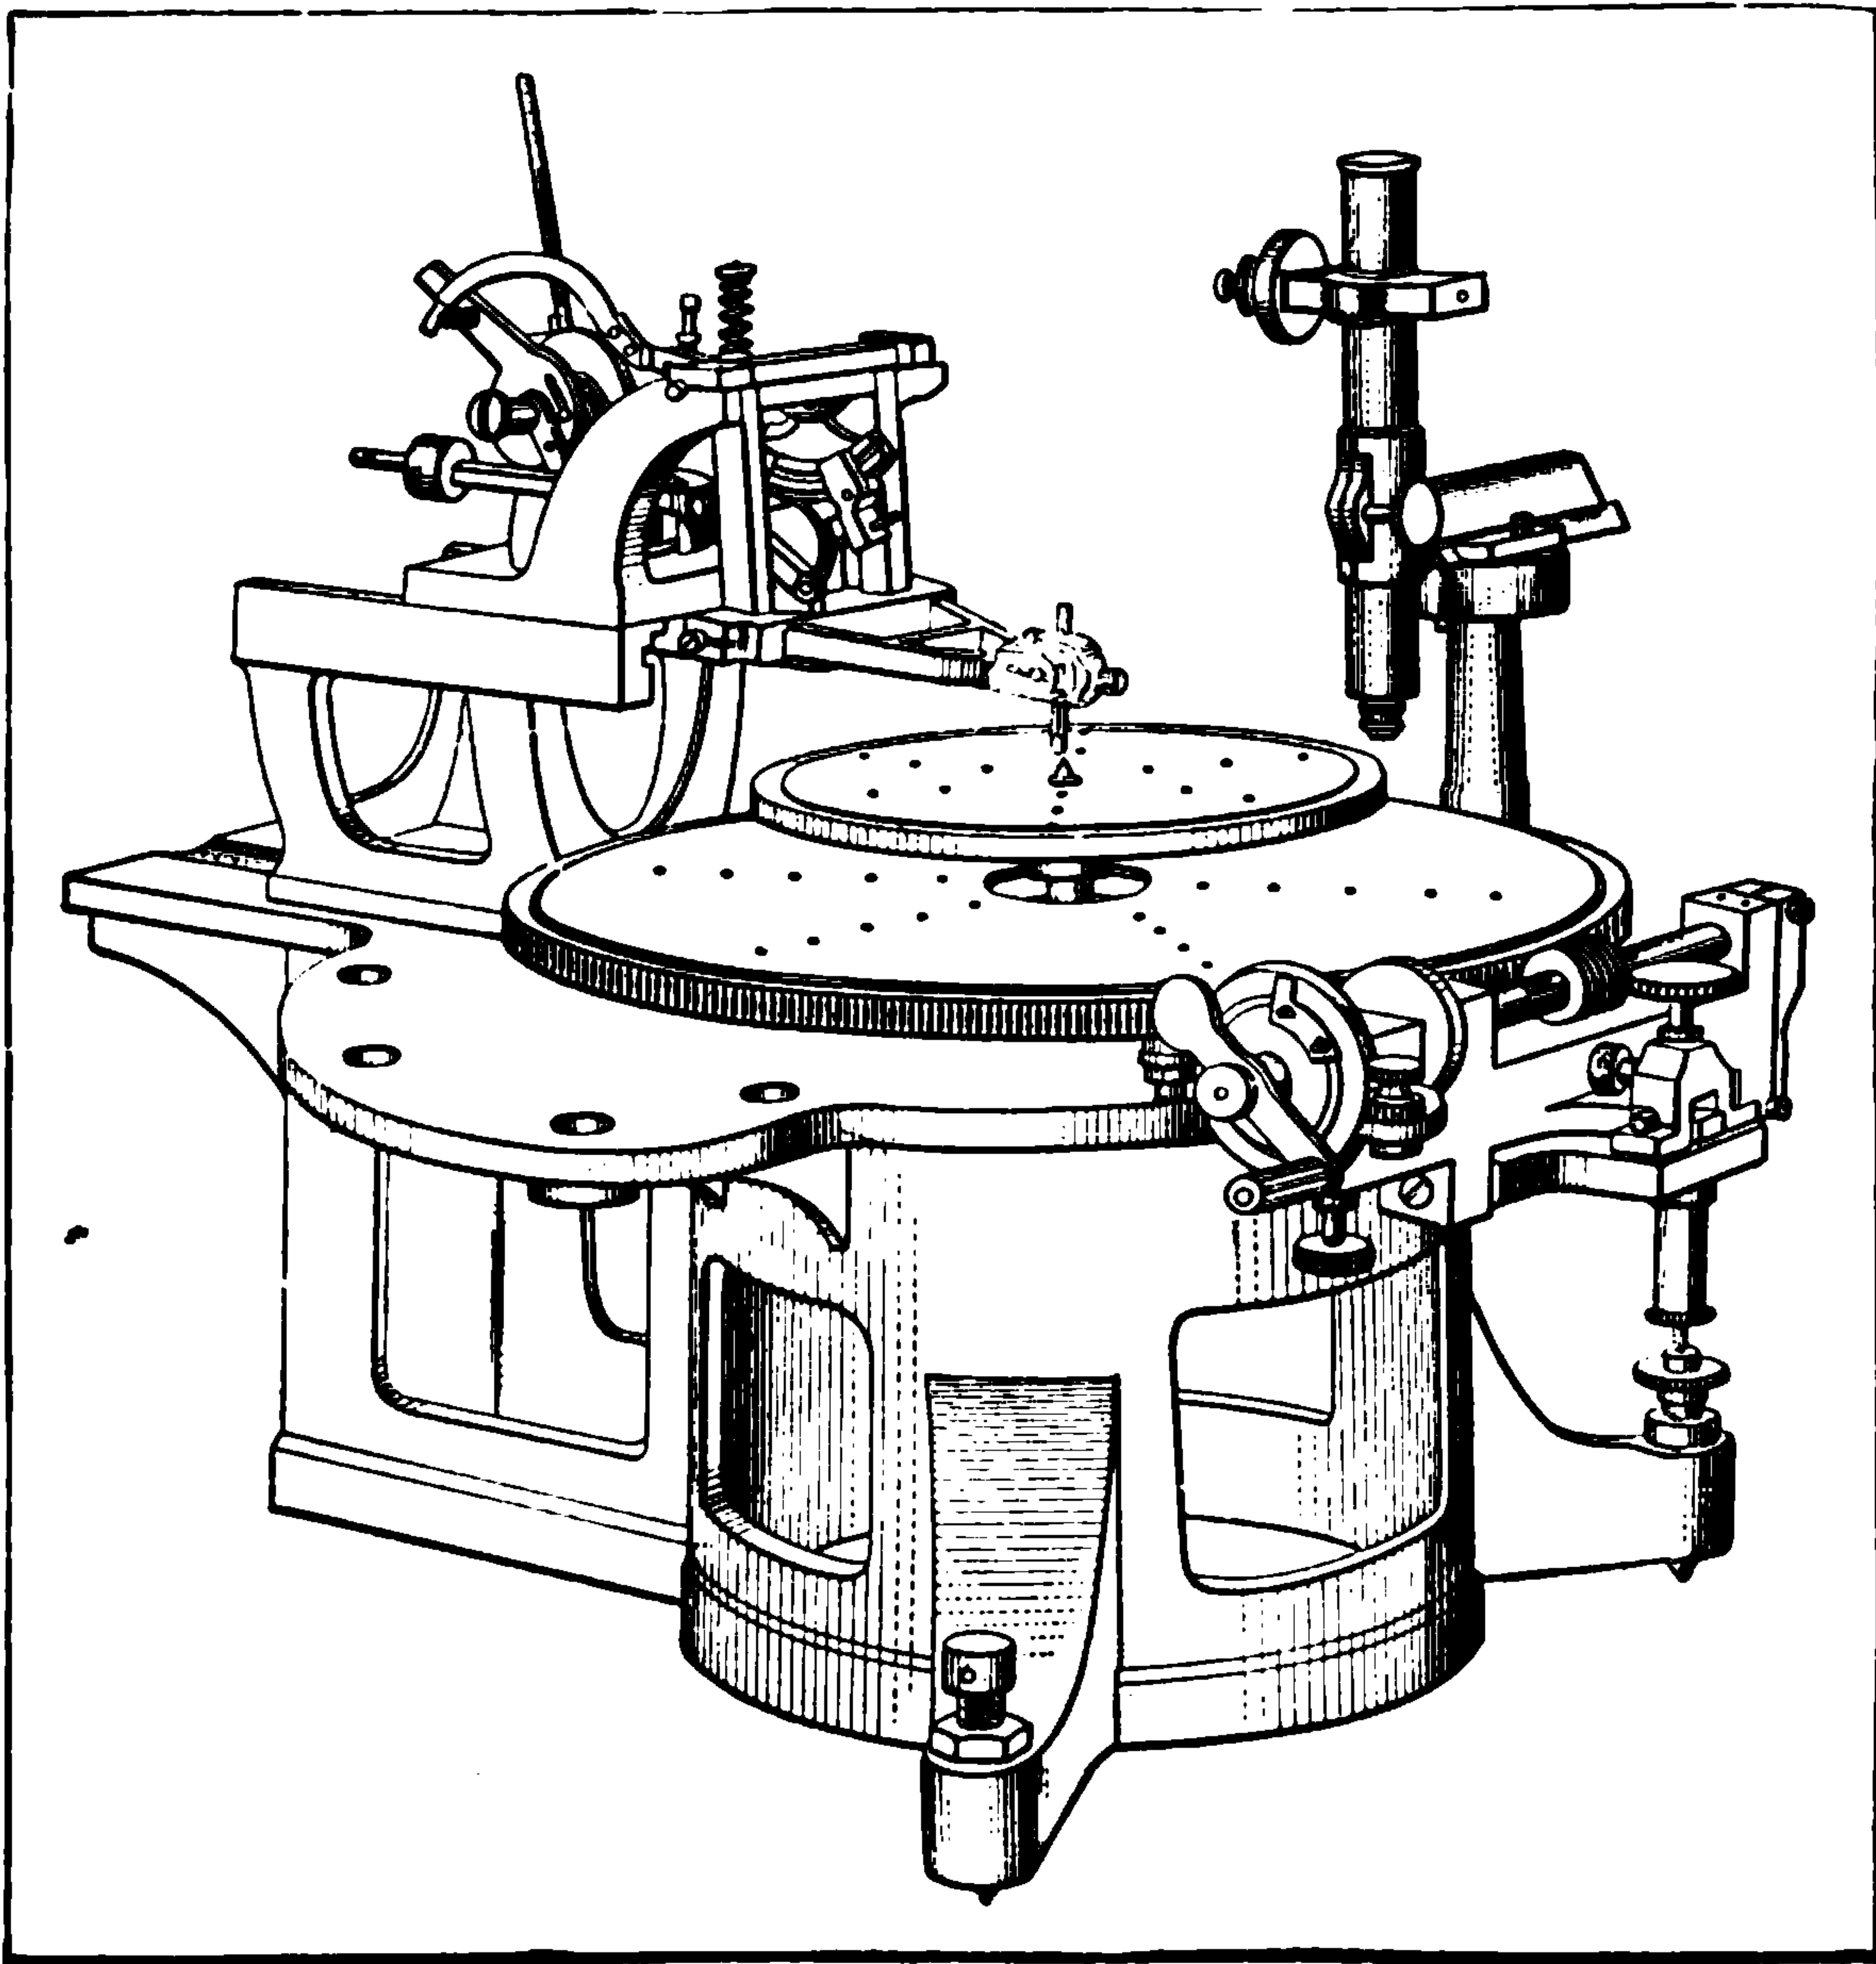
Hand-operated Circular Dividing Engine or Graduating Machine
